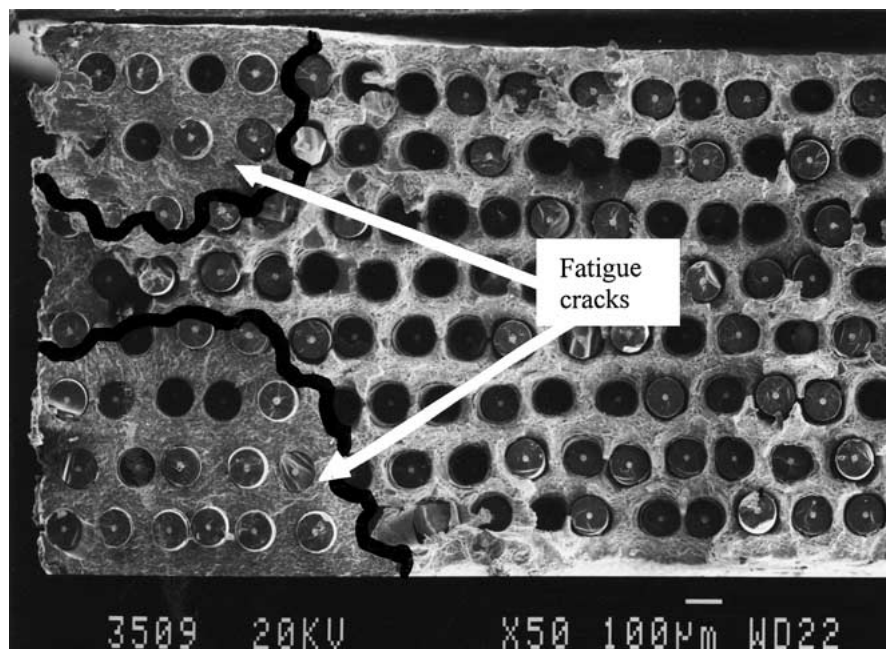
Matrix crack initiation at corners of machined edges.
